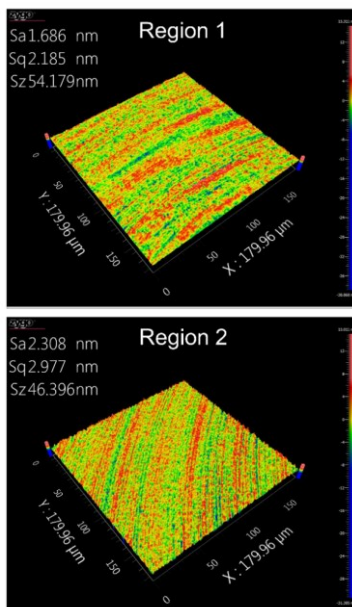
The surface roughness of the machined aspheric surfaces when using the traditional single-point diamond turning method.
